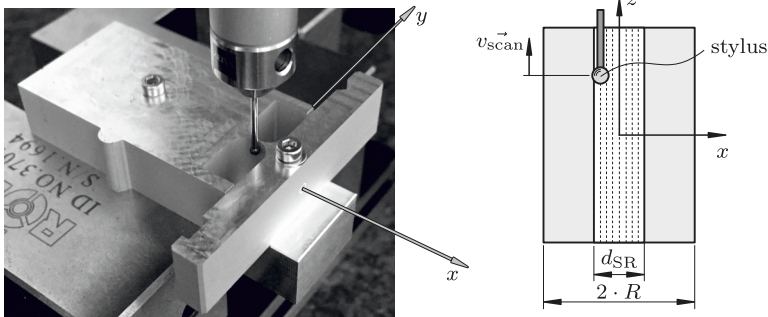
Stylus of the CMM in contact with a flexure hinge specimen manufactured by WEDM.
